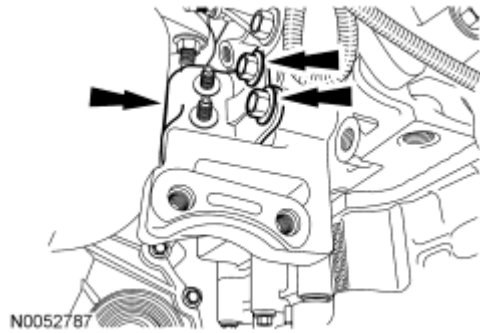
Locating Catalytic Converter Band Clamp LH Half Nuts
